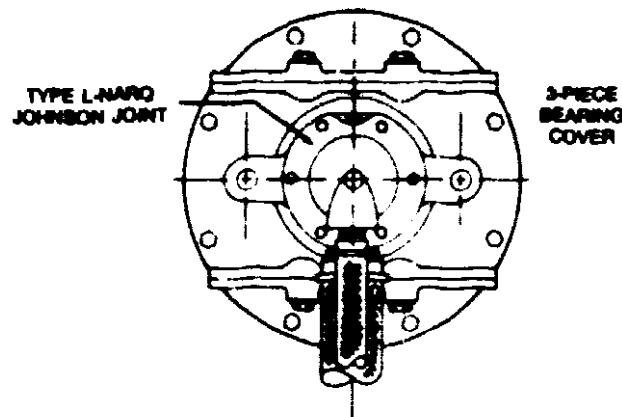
Support rods fastened directly to 3-piece bearing covers. This arrangement permits inspection of the bearings, top and bottom, without removing the joint from the dryer.
